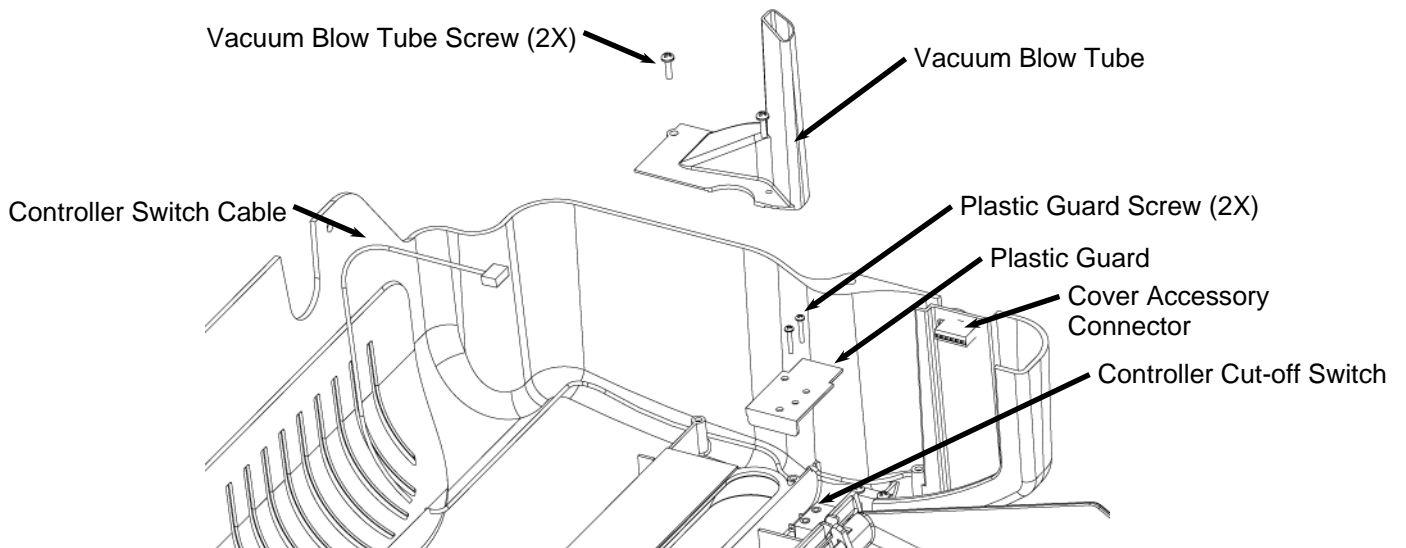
VIEW OF THE CONTROLLER CUT-OFF SWITCH REMOVAL
